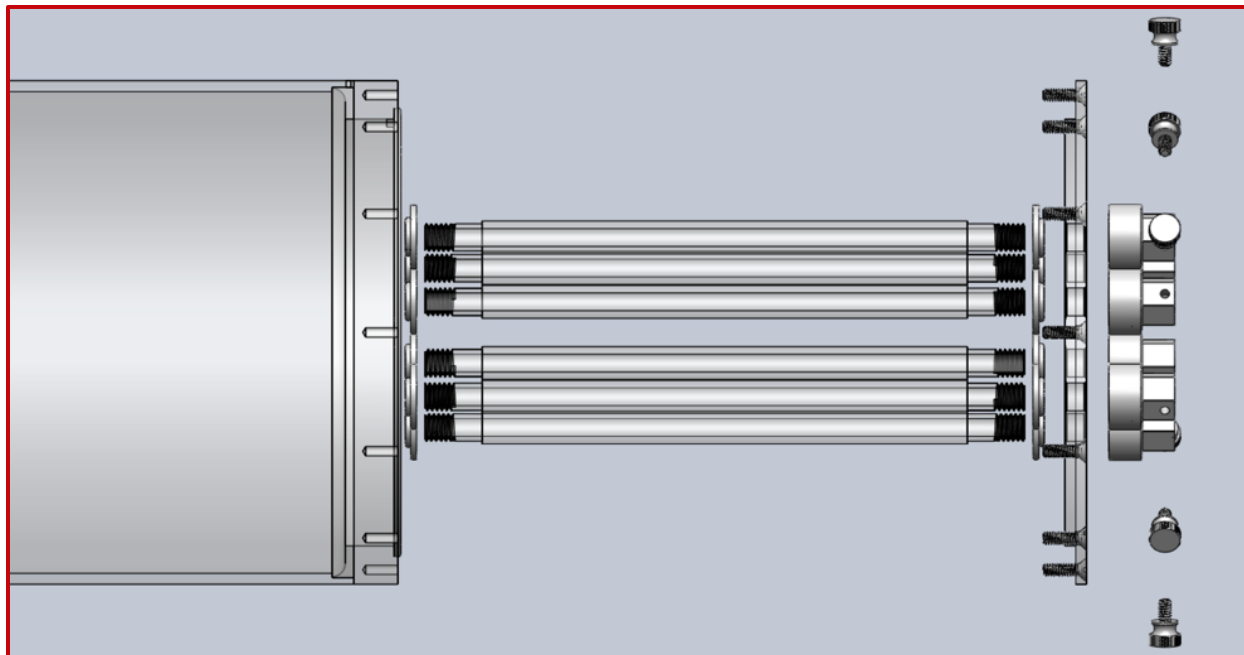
An exploded 3D rendering of the heart module showing the backplate and 6 cavity rods removed from the module housing. Rods can be used to insert measurement objects, needles, leads, etc., or not be used at all due to the modularity of the design.
